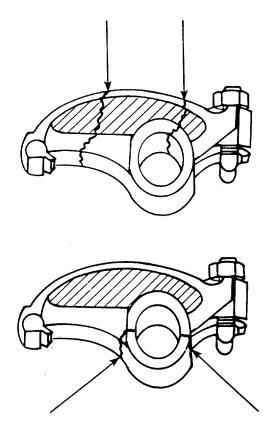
Crack Inspection Areas on Rocker Levers.
